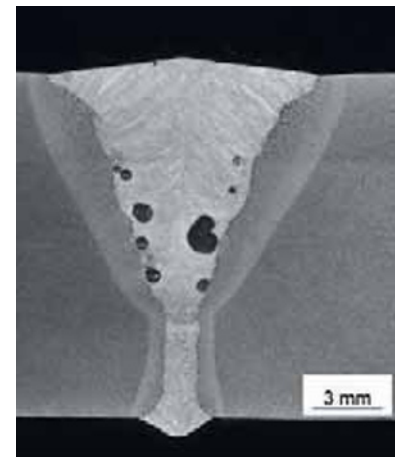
Cross-section of a hybrid welded sample with 1.2 mm gap
